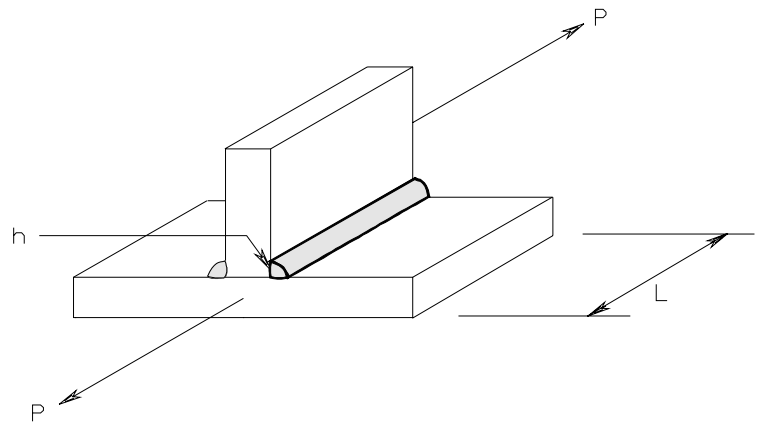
Double Fillet Weld with Parallel Loading (*Courtesy of the American Welding Society*)
